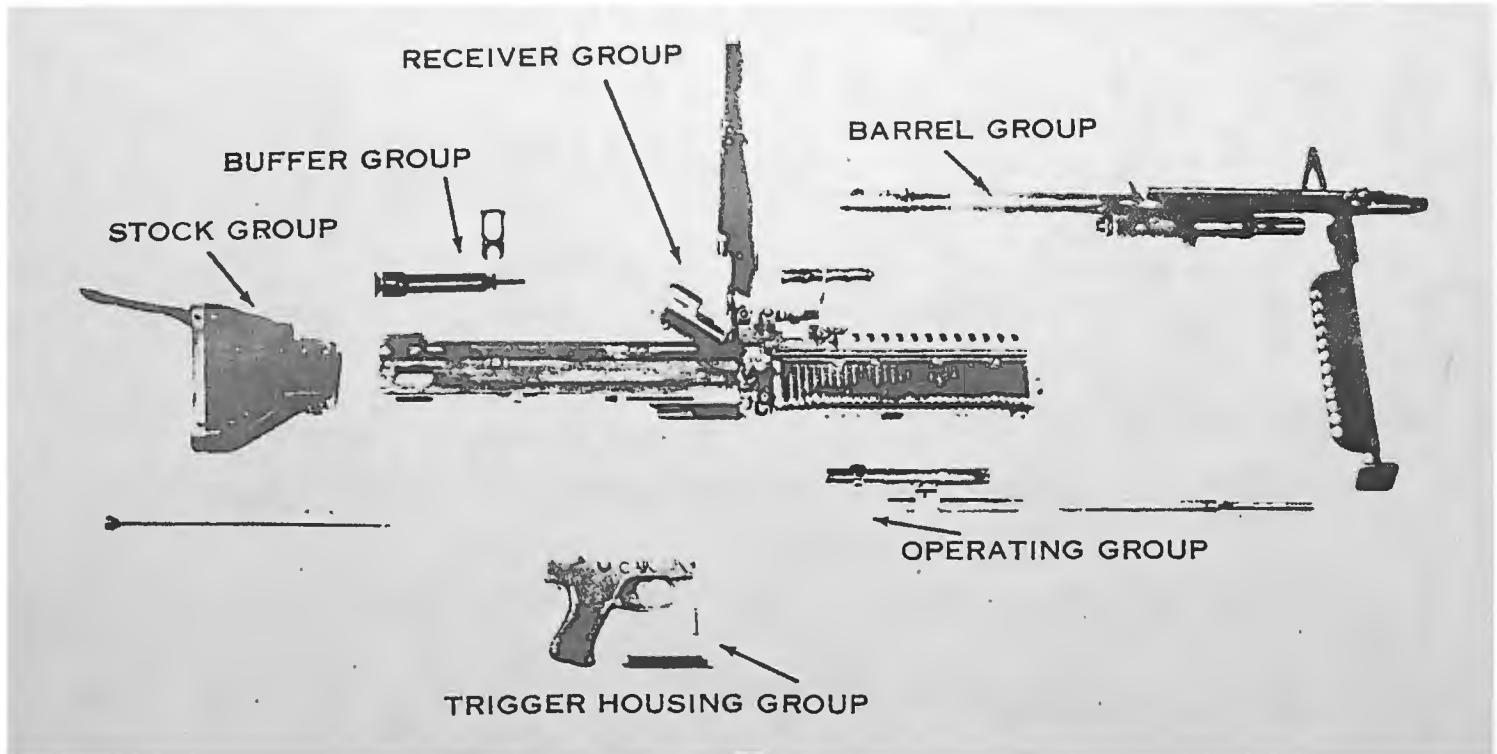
MACHINEGUN DISASSEMBLED INTO SIX MAJOR GROUPS
